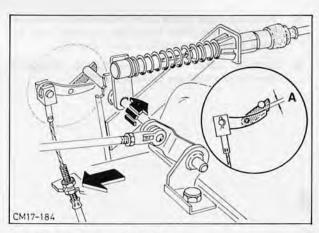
Adjust downshift cable A – 0,5 to 1,3 mm (0,02 to 0,05 in)
